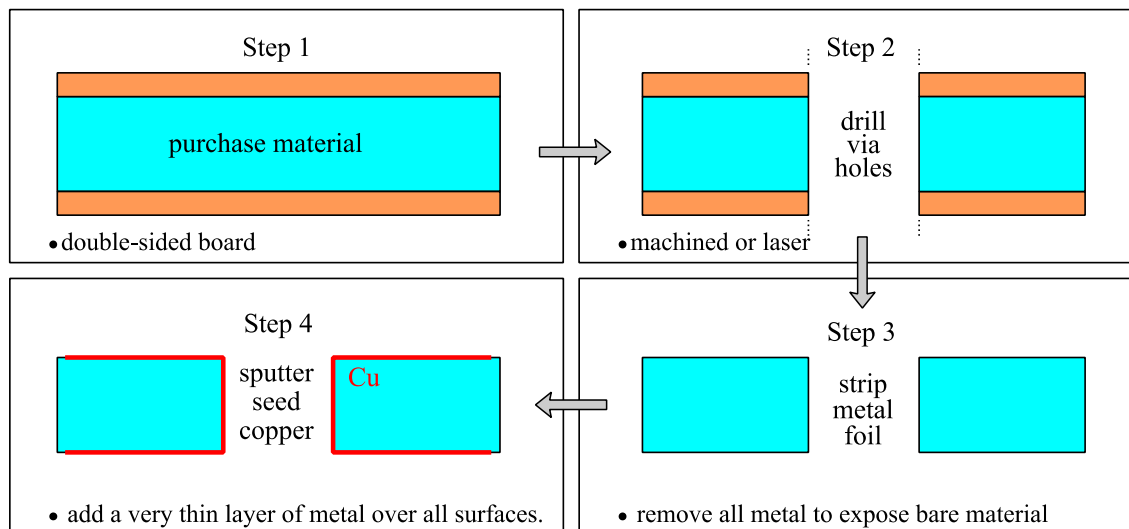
Steps 1 to 4 for the Lintek PCB manufacturing sequence for additive metal processing.
